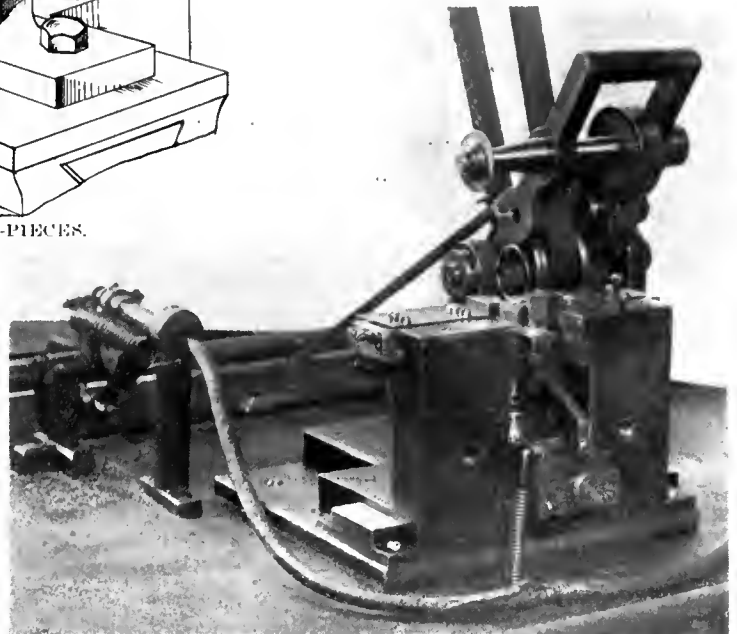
SWING TYPE BENCH MILLING MACHINE WITH SLIDING JAWS FOR CLAMPING END-PIECE.
